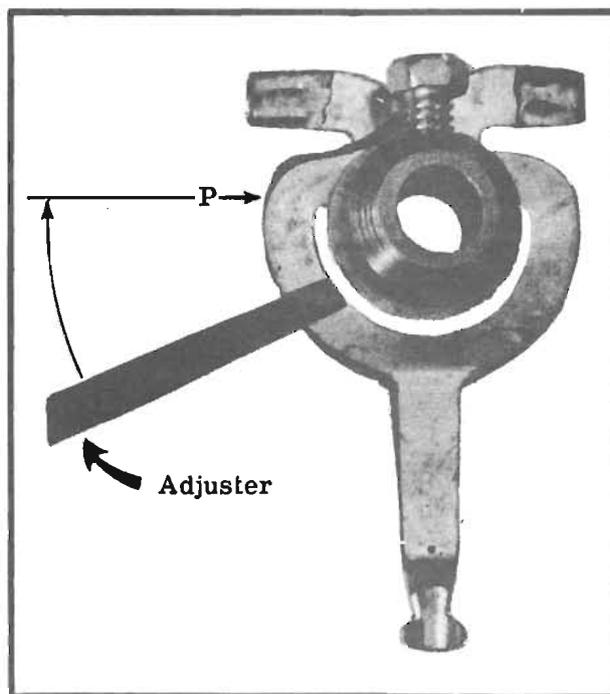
Remove Tension (Follow) From Line and Control Wiper Spring by Working Adjuster to Point P.
